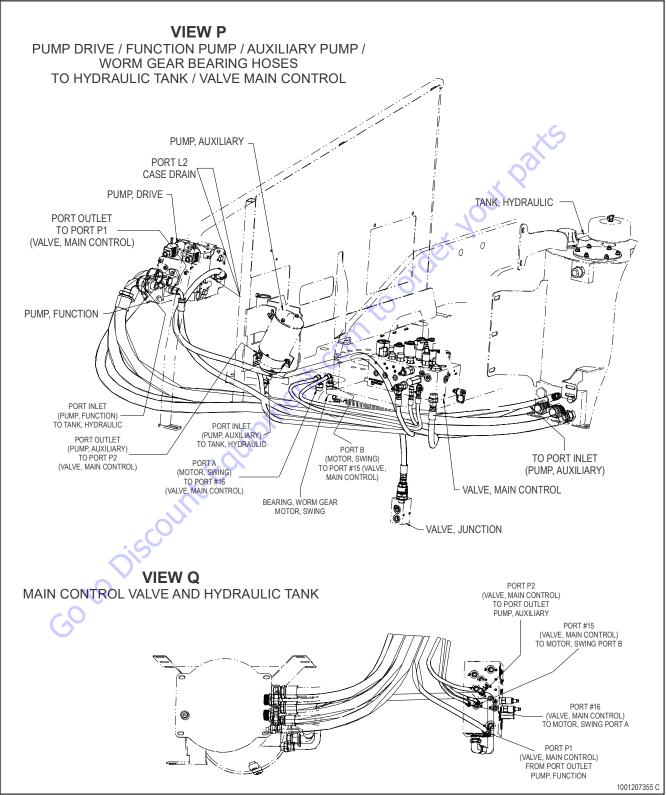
Hydraulics Installation - Sheet 19 of 28
